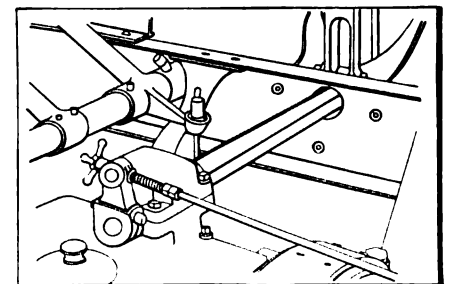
Method of making a brake adjustment that can be easily tightened
